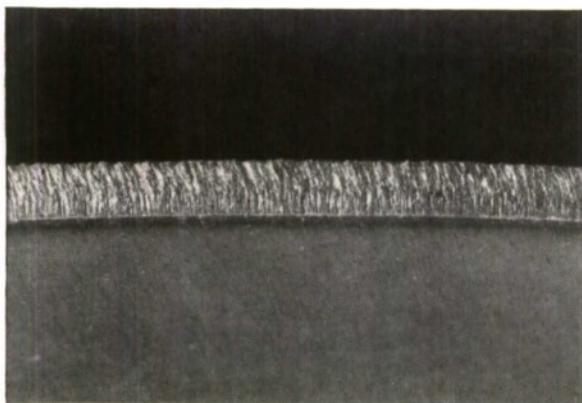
Cut edge of cut in 0·080 in. thick high carbon steel made at 40 in./min.
